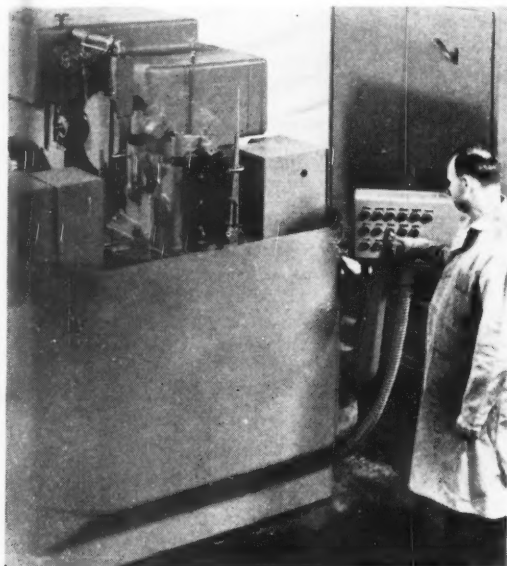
Thompson Truformtic grinder in which production of 4,000 parts per hour may be obtained.
